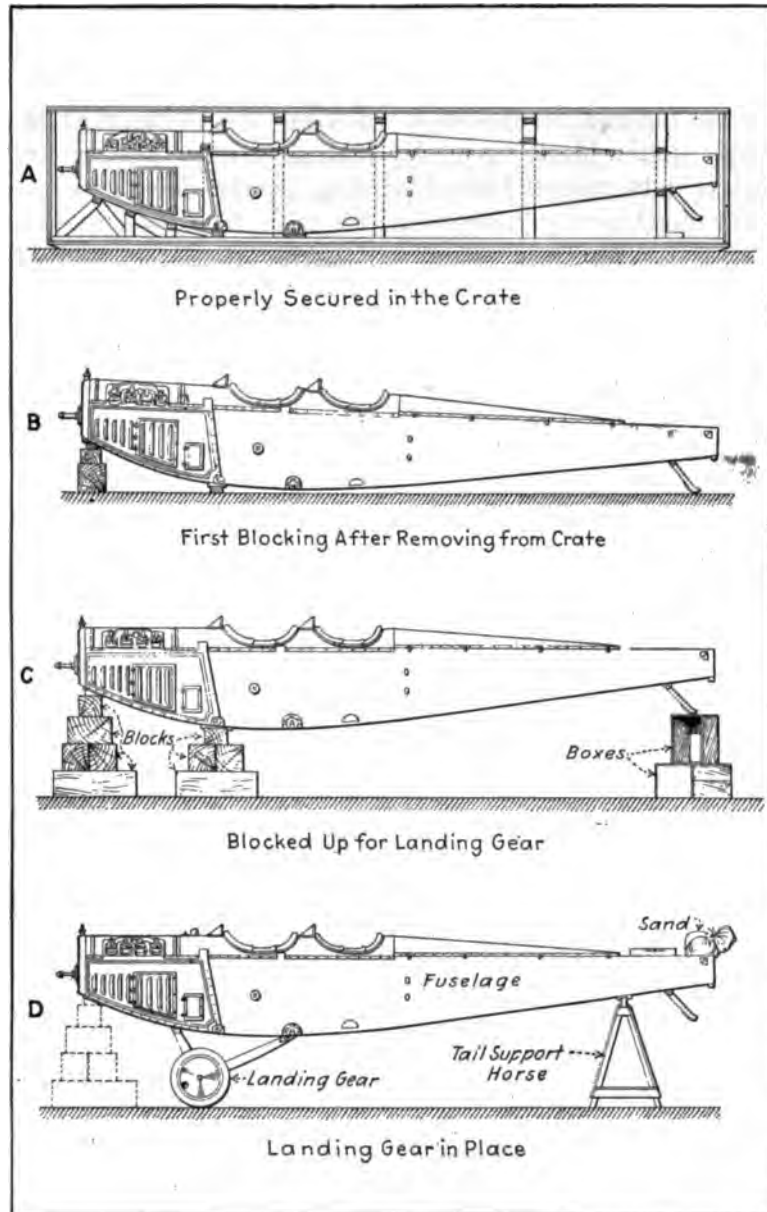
Showing Steps in Uncrating Airplane Fuselage and Blocking It Up to Take Landing Gear. A. Fuselage in Crate. B. First Blocking. C. Blocked Up for Landing Gear. D. Landing Gear in Place, Blocks Removed.
